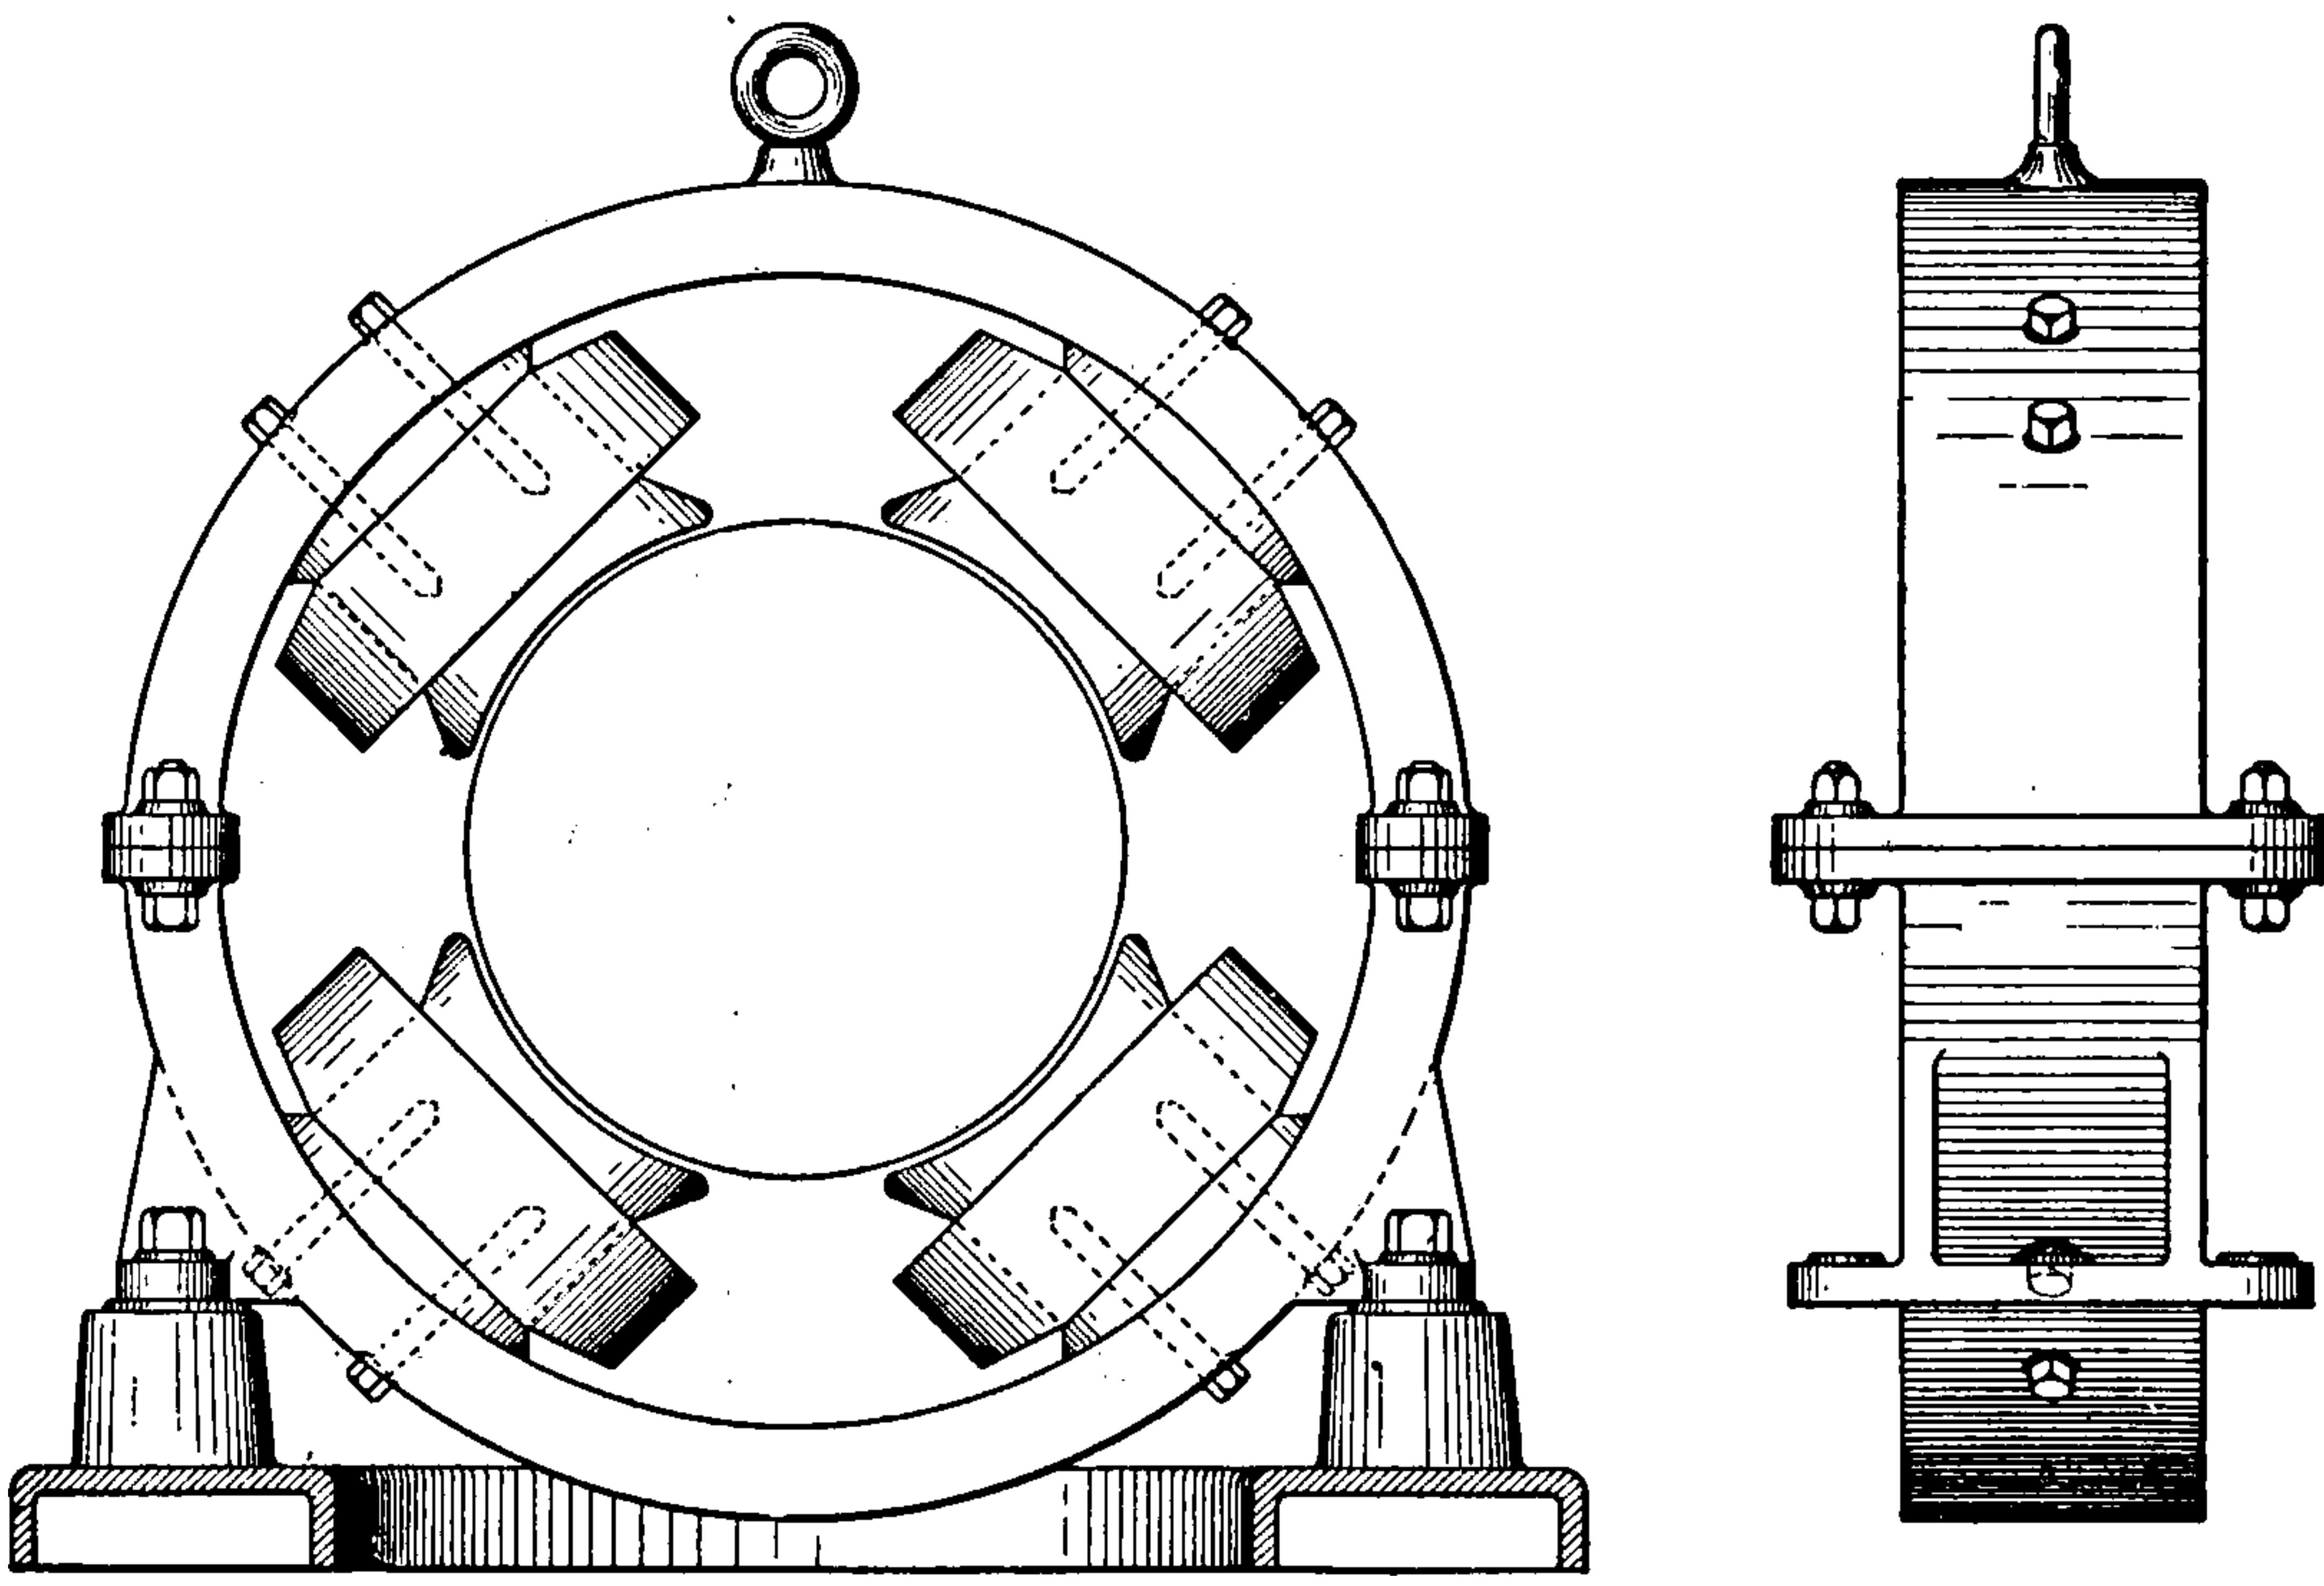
Magnet-Yoke with Parts Bolted Together at Back and Front of Ring
